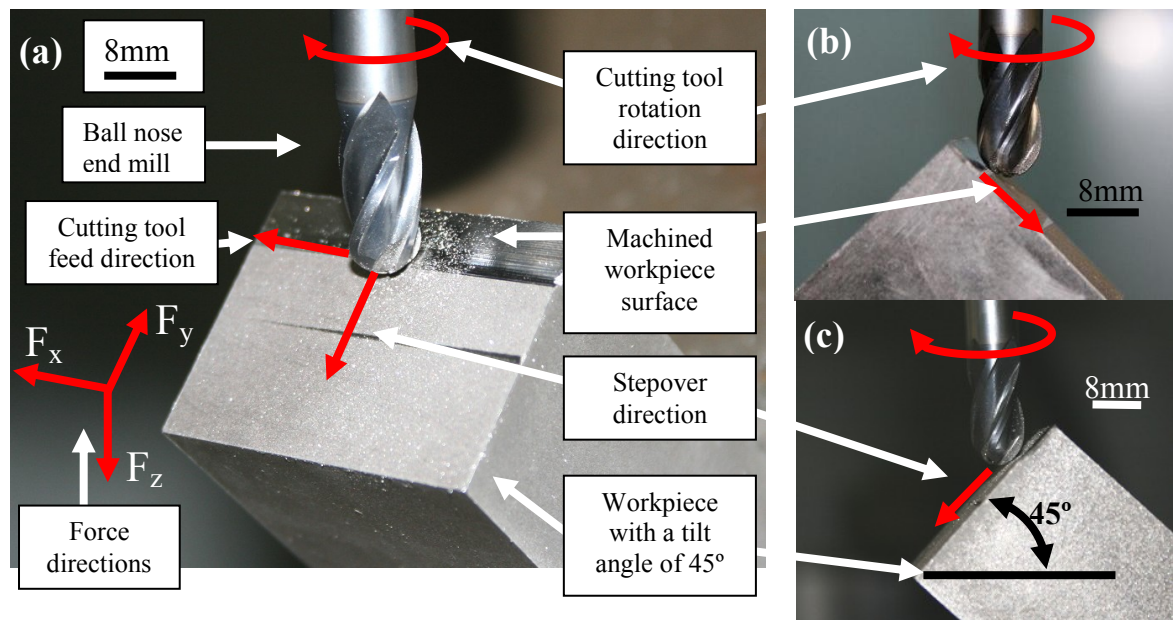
Images showing the orientation used for milling tests, (a) Isometric view, (b) Left side view (Cutting tool feed direction: out of paper), (c) Right side view (Cutting tool feed direction: into the paper)
